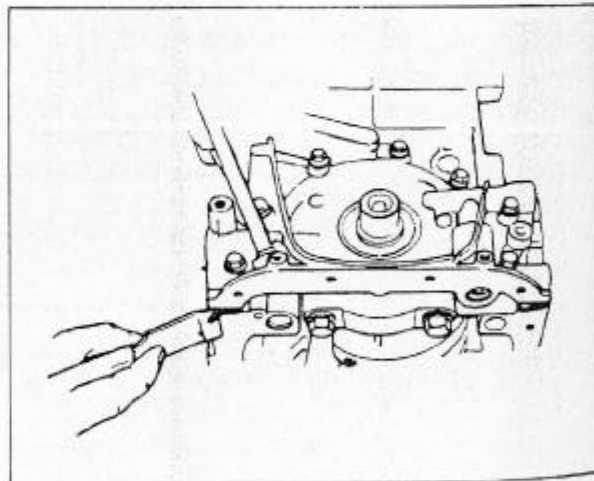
A — 37 ATTACHMENT OF OIL PUMP
